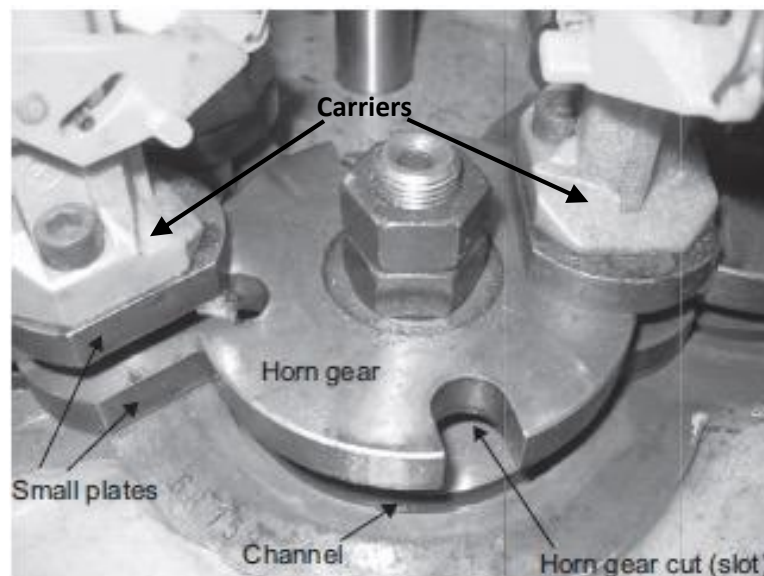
Key elements of the horn gear system for carrier motion. Small plates keep the carrier stable on the horn gear with the channel guiding the carrier in the desired sinusoidal path. Adapted from [11]
